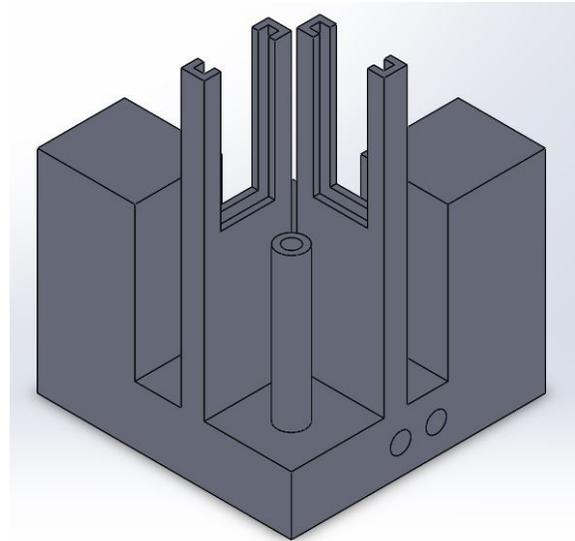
SolidWorks of one of the 3-D printed blocks that will hold the stepper motors and rack and pinion system.
